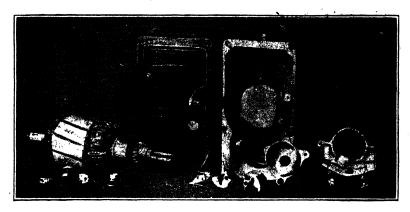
Details Westinghouse Lighting and Ignition Generator
